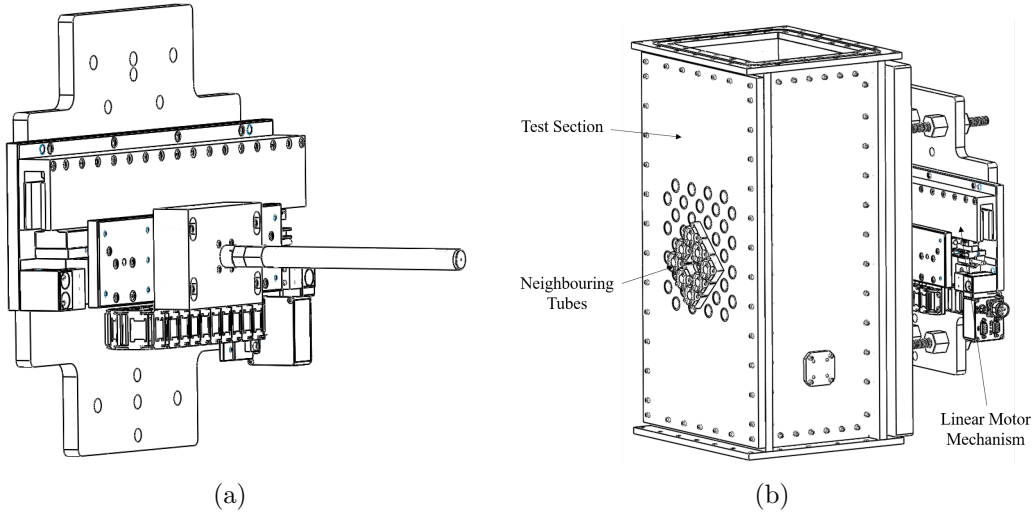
Experimental test setup showing: (a) linear motor mechanism, (b) test section.
